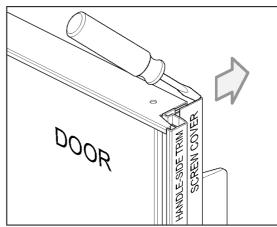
B. Screw Cover Removal with Handle-Side Trim
